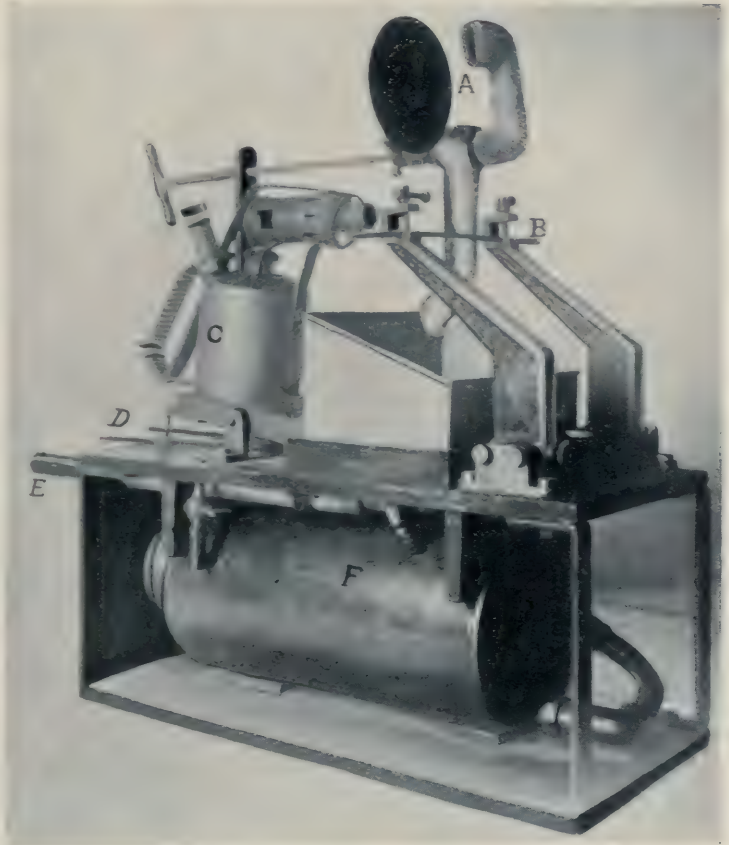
COWPER-COLES MACHINE FOR WELDING ALUMINIUM.
